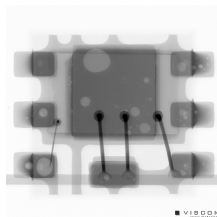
DFN2020MD-6 (SOT1220) with tin-plated wettable side pads (1-D191) Solder paste printing without fails
